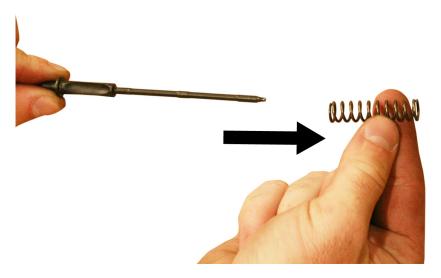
Slide the Firing Pin Spring off the Firing Pin.
